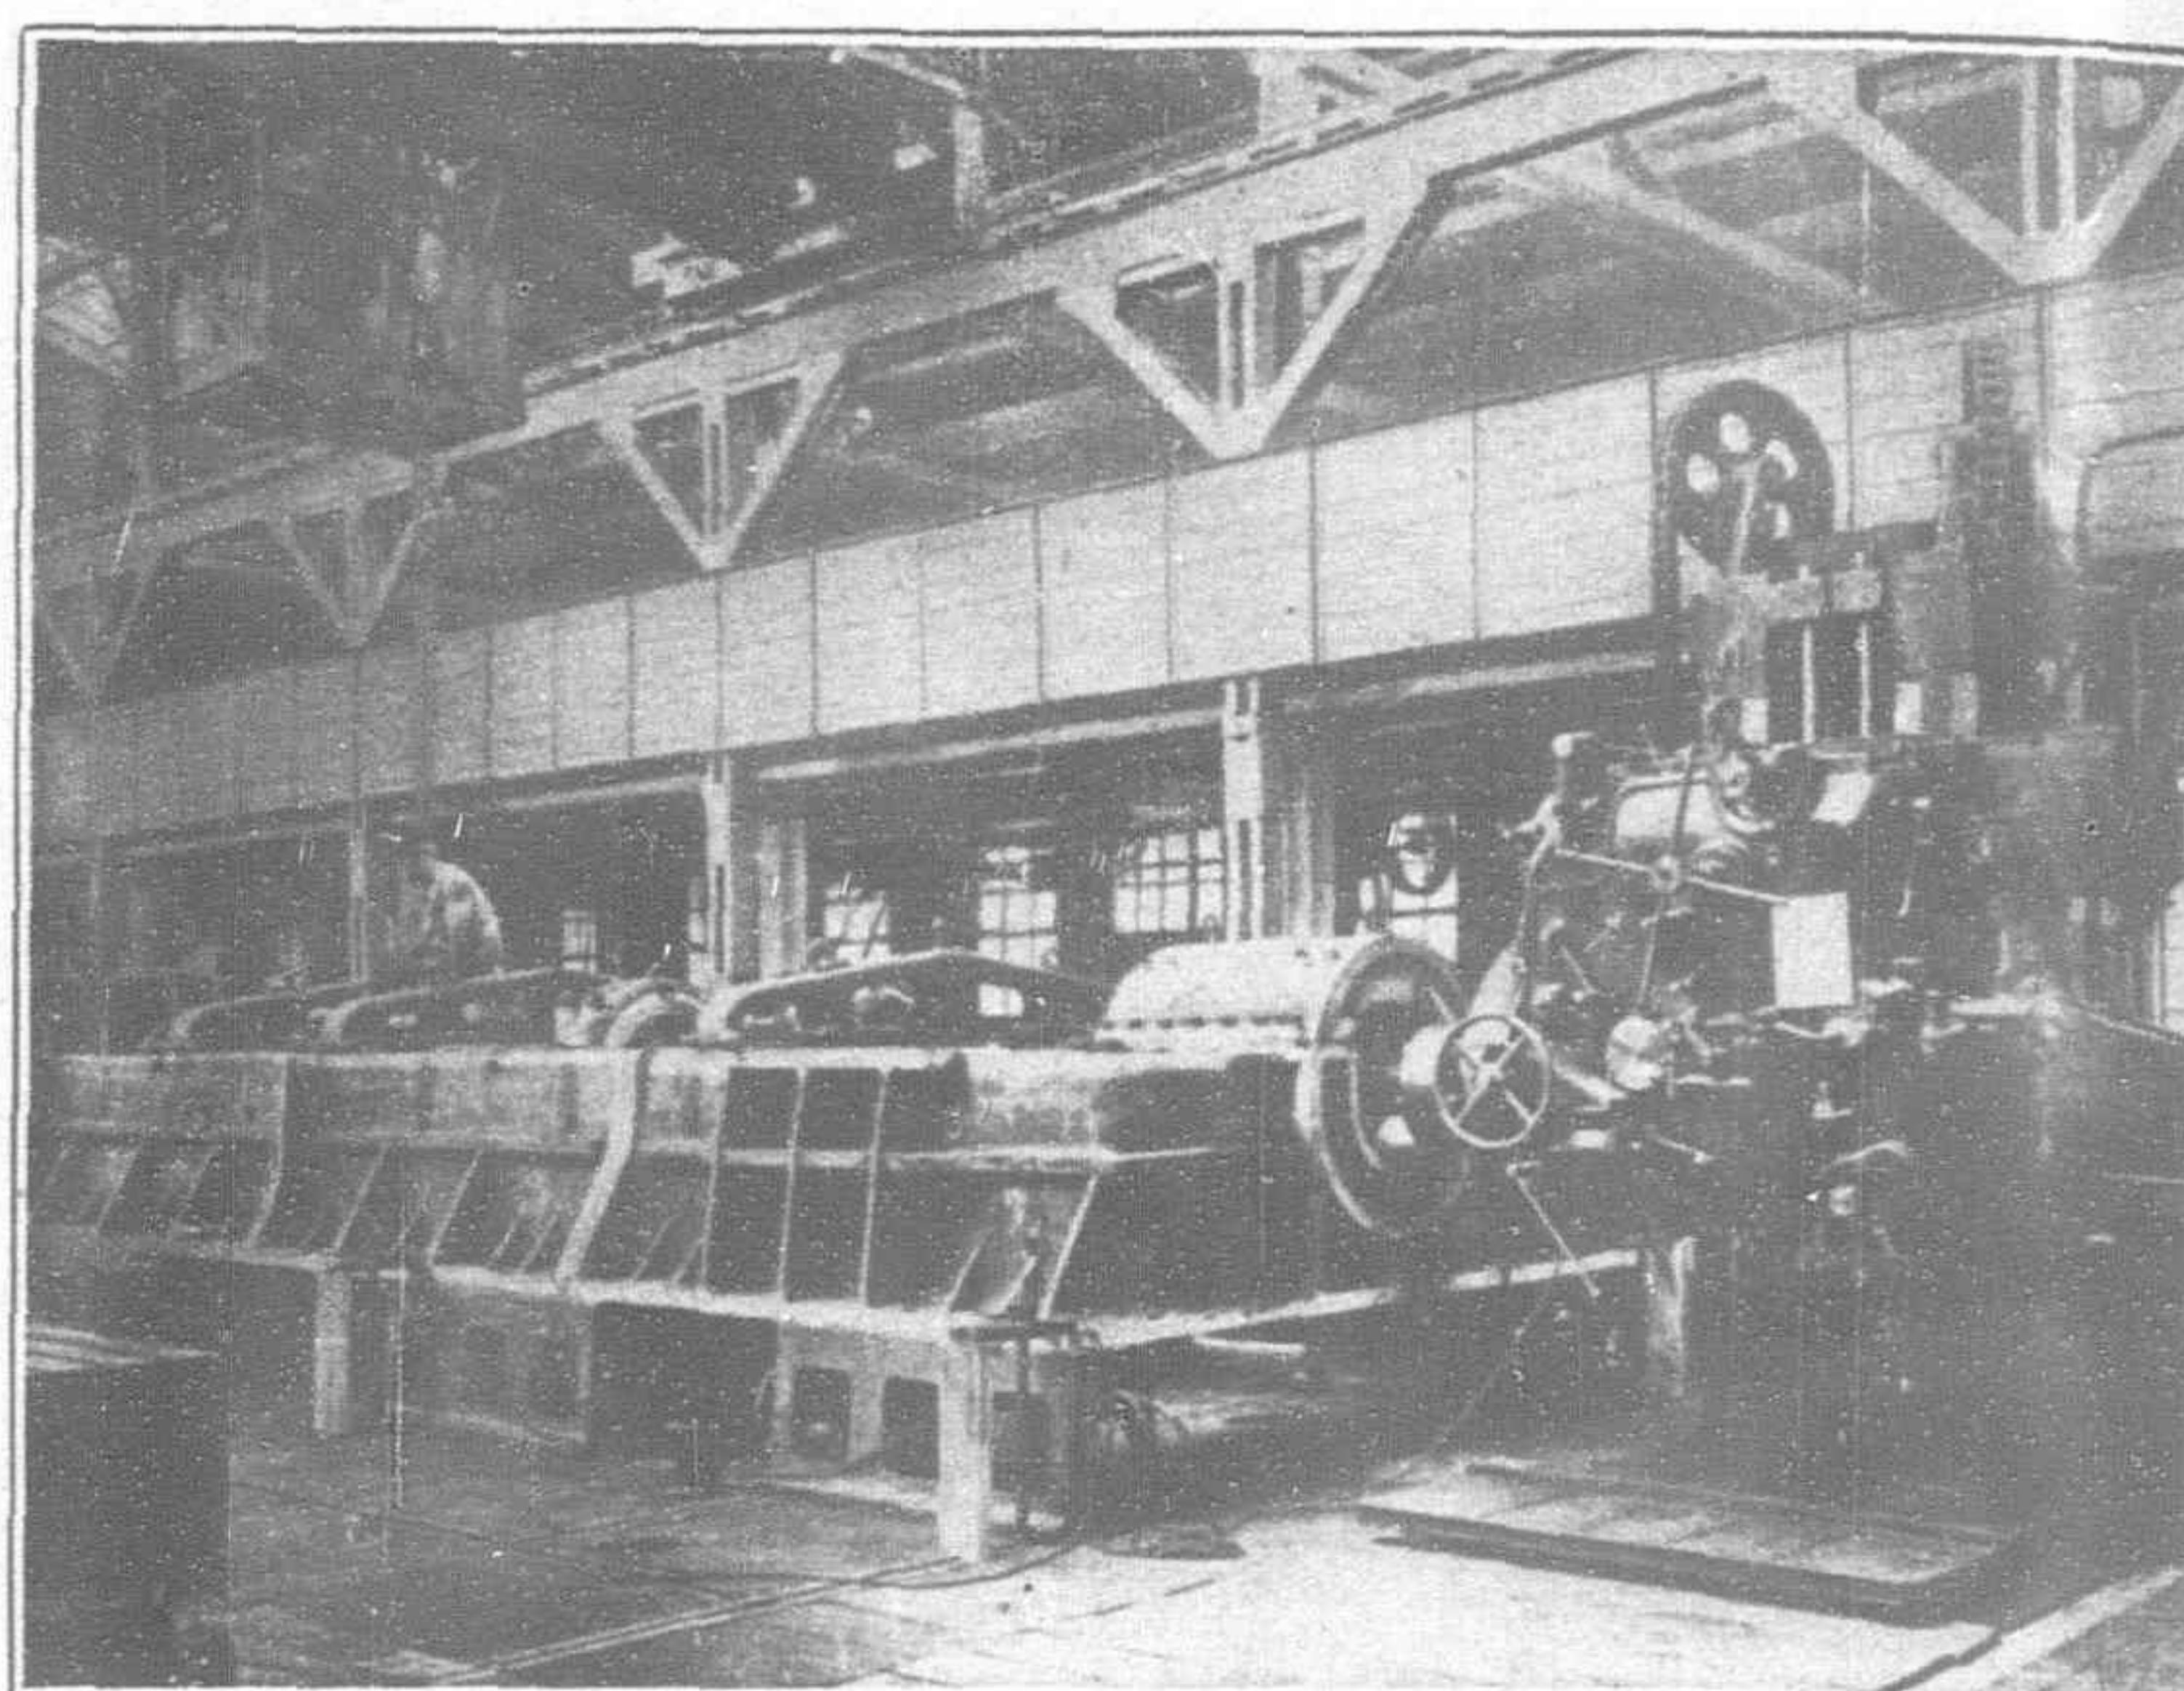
A Machine for Boring Main Bearings and Milling their Ends
